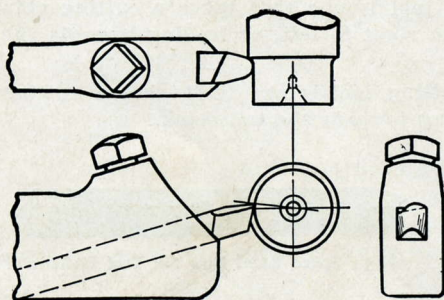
For Cutting Carbon Tool Steel and Cast Iron
